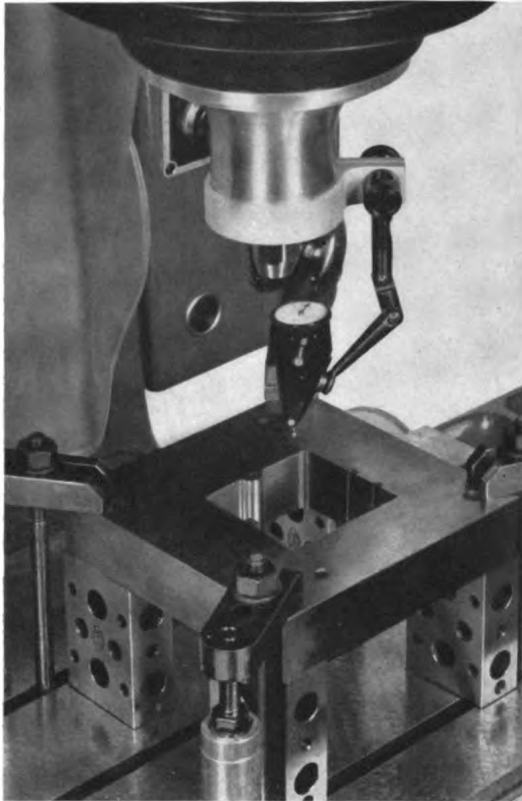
The indicator, though mounted on the grinding spindle, is controlled by the main spindle.
